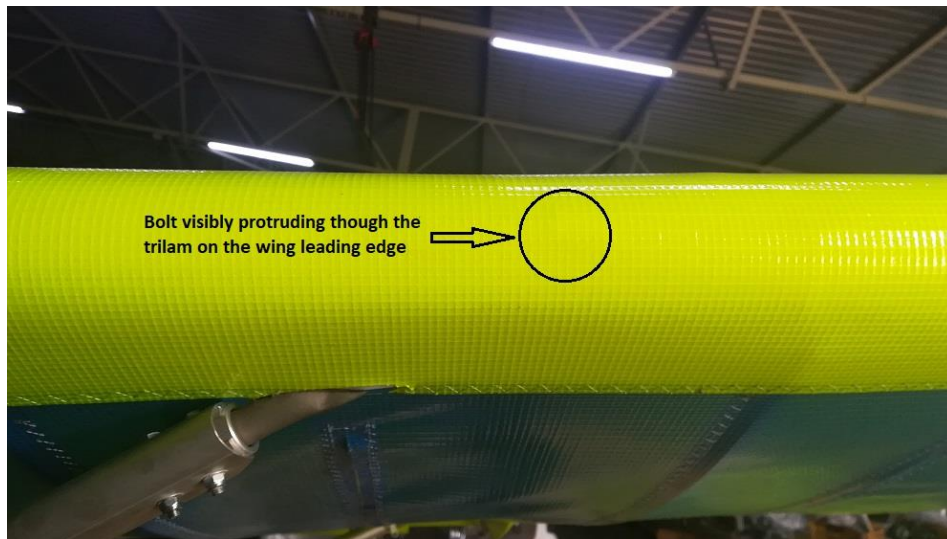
Leading edge of the wing, wing strut top mounting bolt
